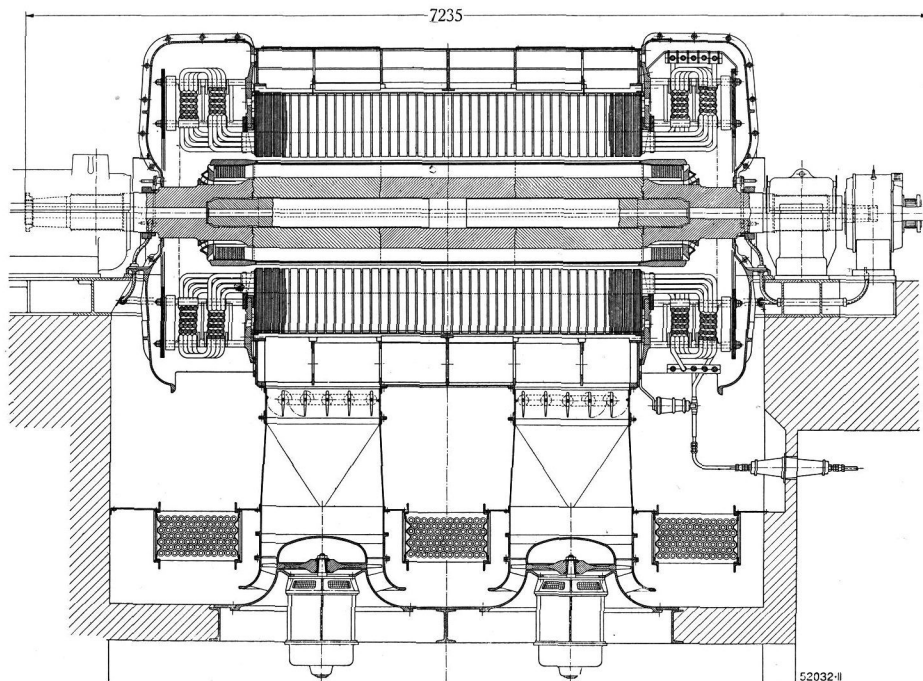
Section of a three-phase turbo-generator 31,250 kVA. 22,000 V, 3000 r. p. m., 50 cycles, with cooling fans mounted separately.
